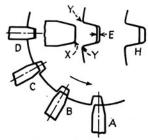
When indexing starts, the lock bolt is released and rides on the periphery of the plate. At point A, it starts to slide down the inclined slot. At B is shown the shearing or wearing action that takes place. In case the plate has overrun or indexed past its position as at C, the spring behind the lock bolt is required to turn the plate, together with the whole rotating mass attached to it, backward, resulting in wear on the side opposite to that shown at B. At D, complete engagement is shown. Rounded corners as at X and Y should be provided. There should be plenty of clearance as at E to allow for wear because of the small angle of the slot. At H is shown an improved form of gear. It assures clearance and provides for grinding of the angular surfaces if necessary. If the lock-bolt spring is not strong enough to seat the bolt by rotating the plate, vibration will usually complete the seating, causing chatter at the cutting tool or spindle and wear on the bolt and slot. In this type of bolt, the angular sides are alike, hence the direction may be opposite from that shown.
